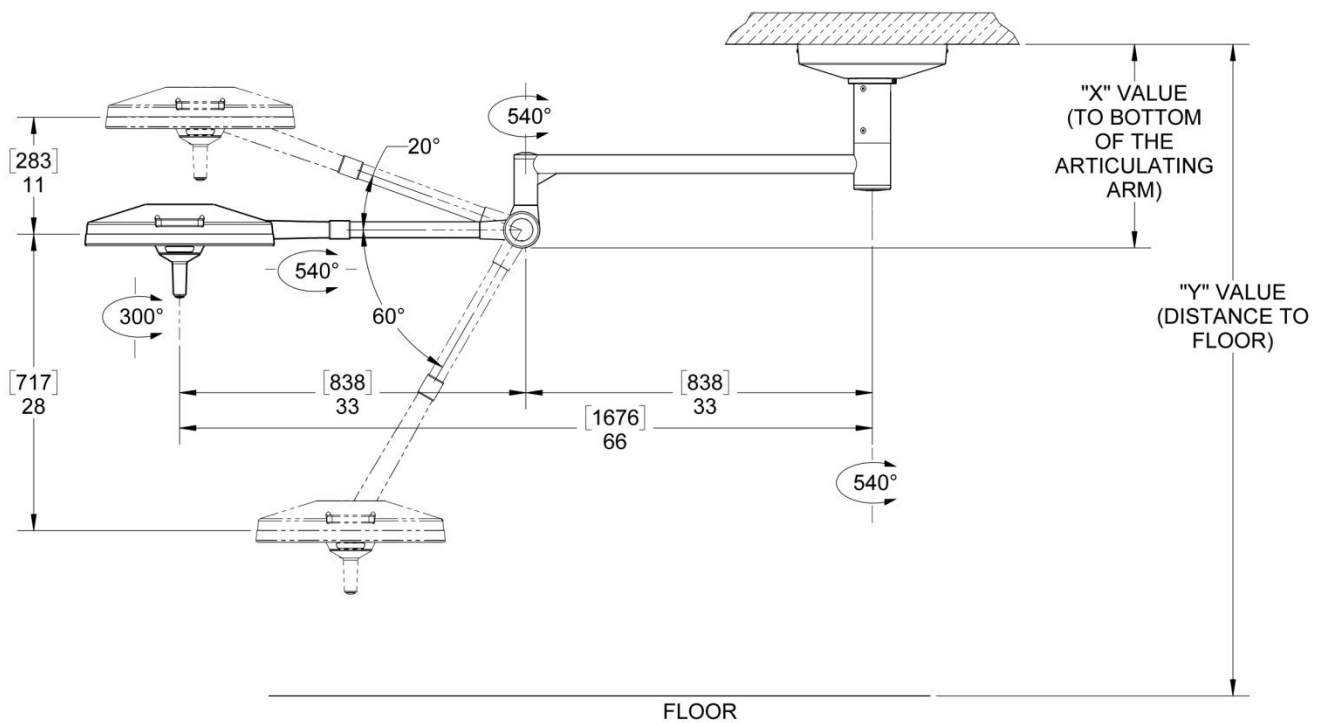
Ceiling Rod Calculation for Single Ceiling Mount
